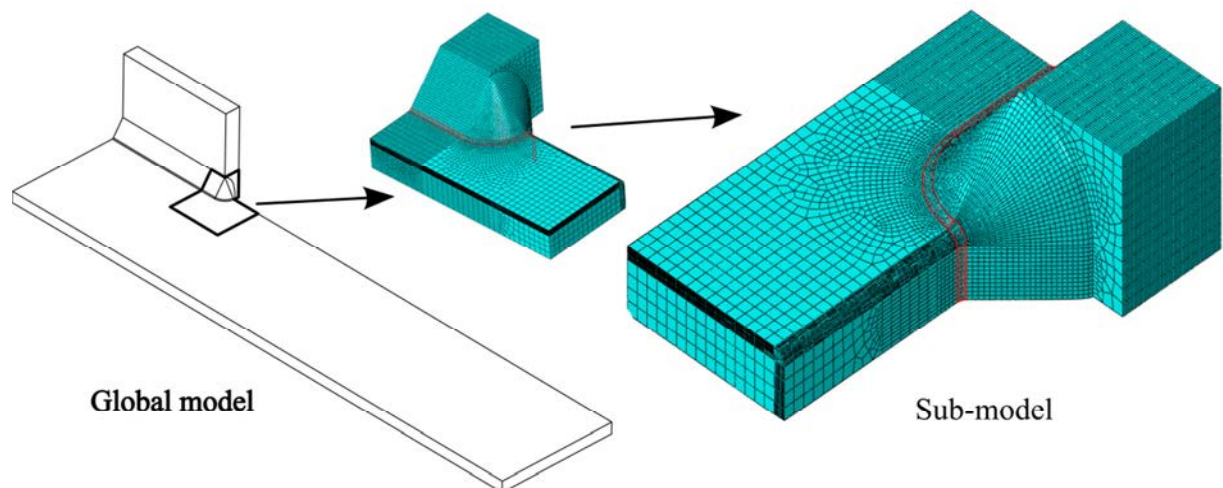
FE model for determining the effective notch stress at the weld toe – fillet welded
